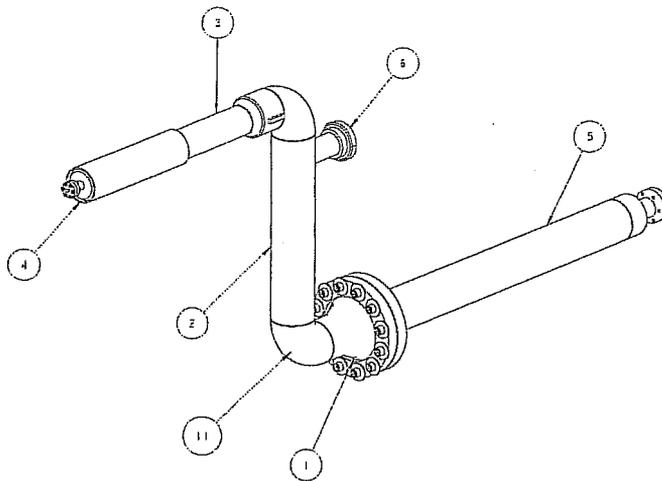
Isometric view of MBX1. 1-Housing with Lambda Plug; 2-Vertical Pipe Section; 3-Horizontal Section (this connects to magnet); 4-test Cap (this is removed for tunnel installation); 5-Conductor Protection Tube (this is removed for attachment to DFBX); 6-Helicoflex Sealing system; 11-Short Radius 3 IPS Weld Elbow.
